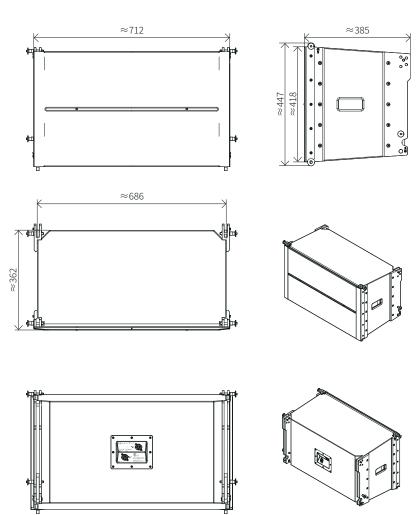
L65 FS / L 65 FS R views and dimensions in millimeters
